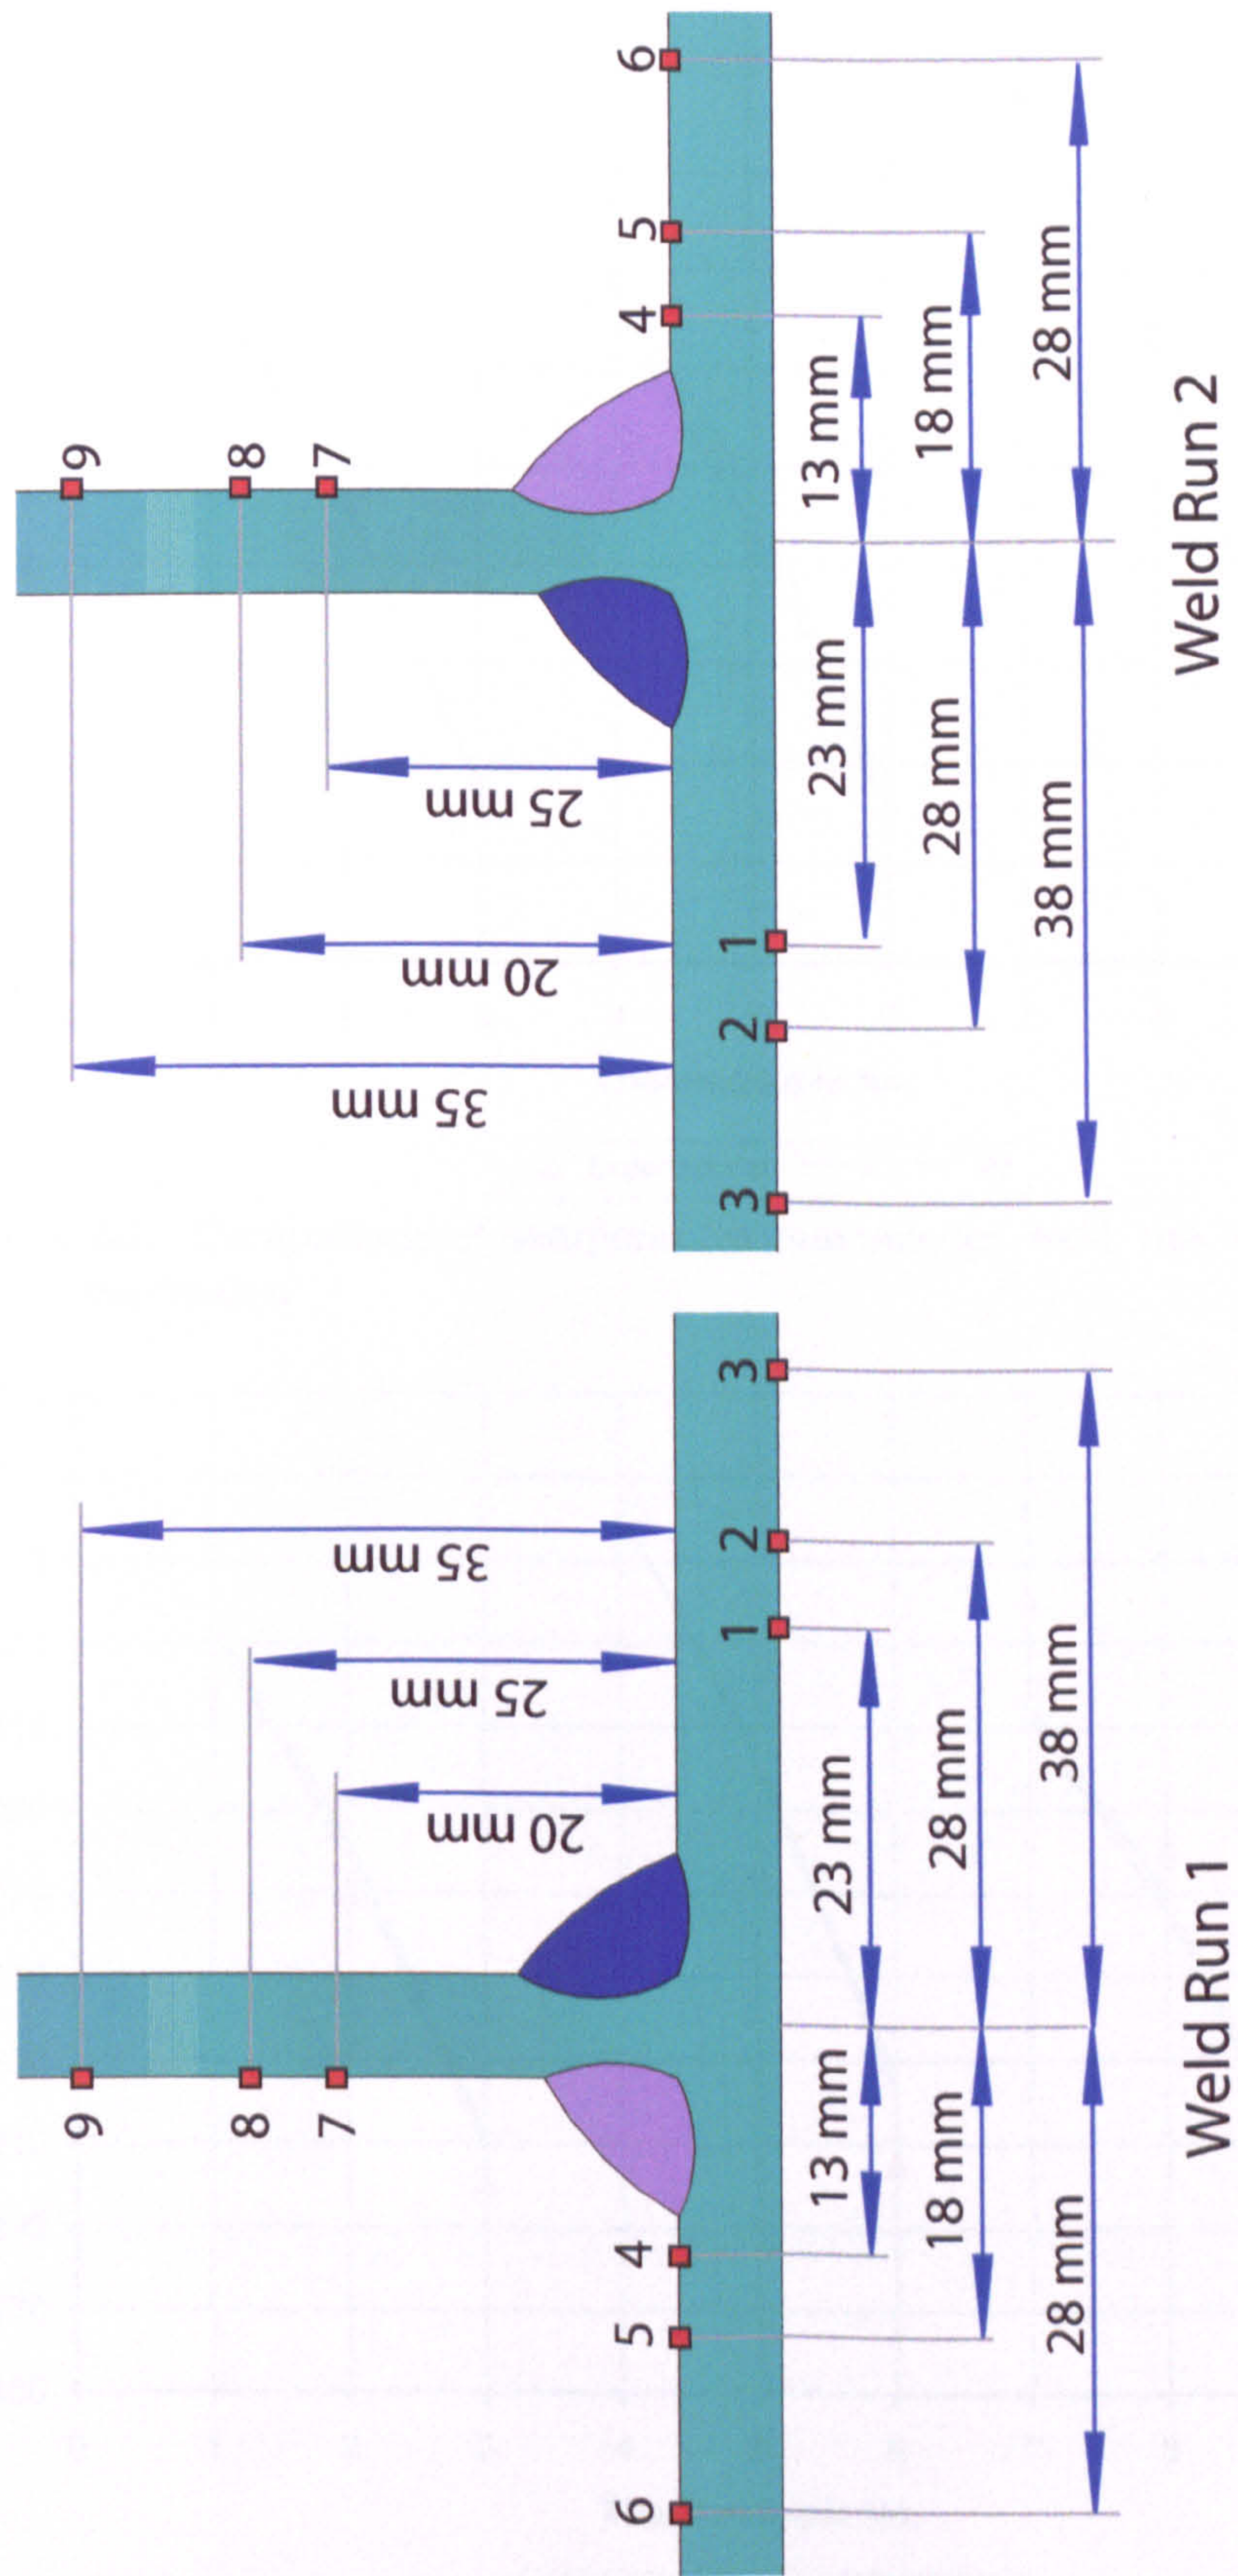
Thermocouple placement and labeling of reference experimental data used in the fillet welding investigation
